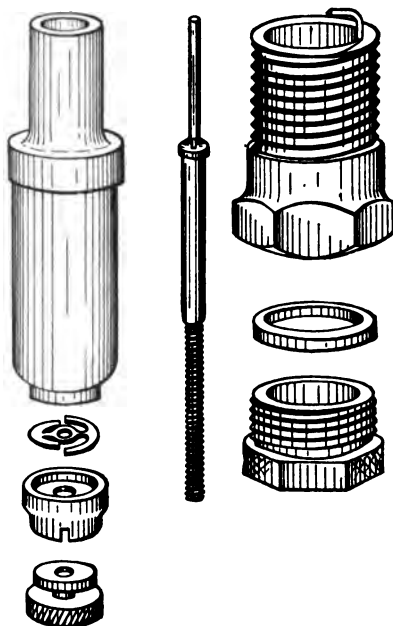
Component Parts of a Soot-Proof Spark-Plug.
